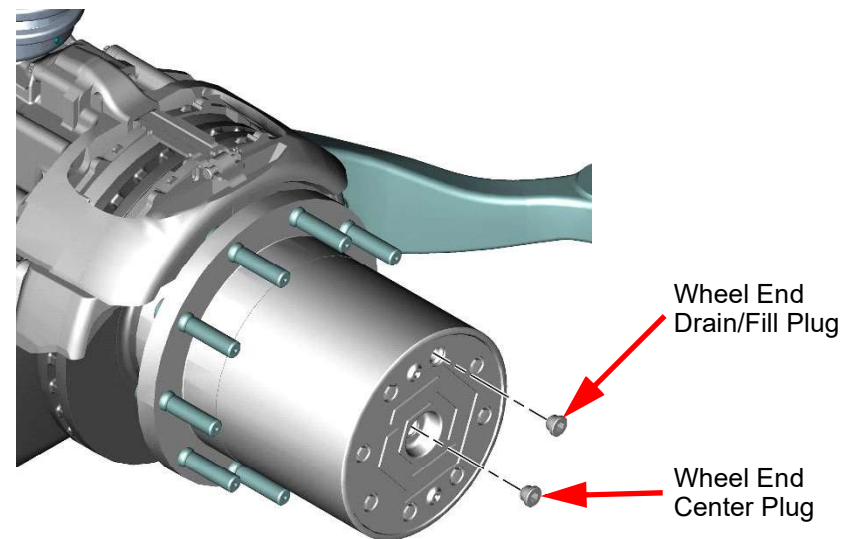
Installing Wheel End Drain/Fill Plug and Center Plug
